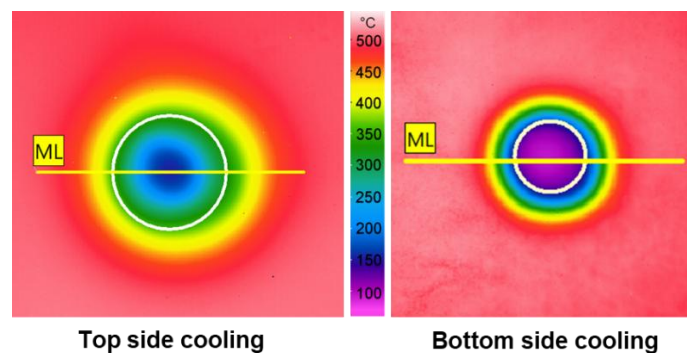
Infrared images of top and bottom side cooling (AA6082)
